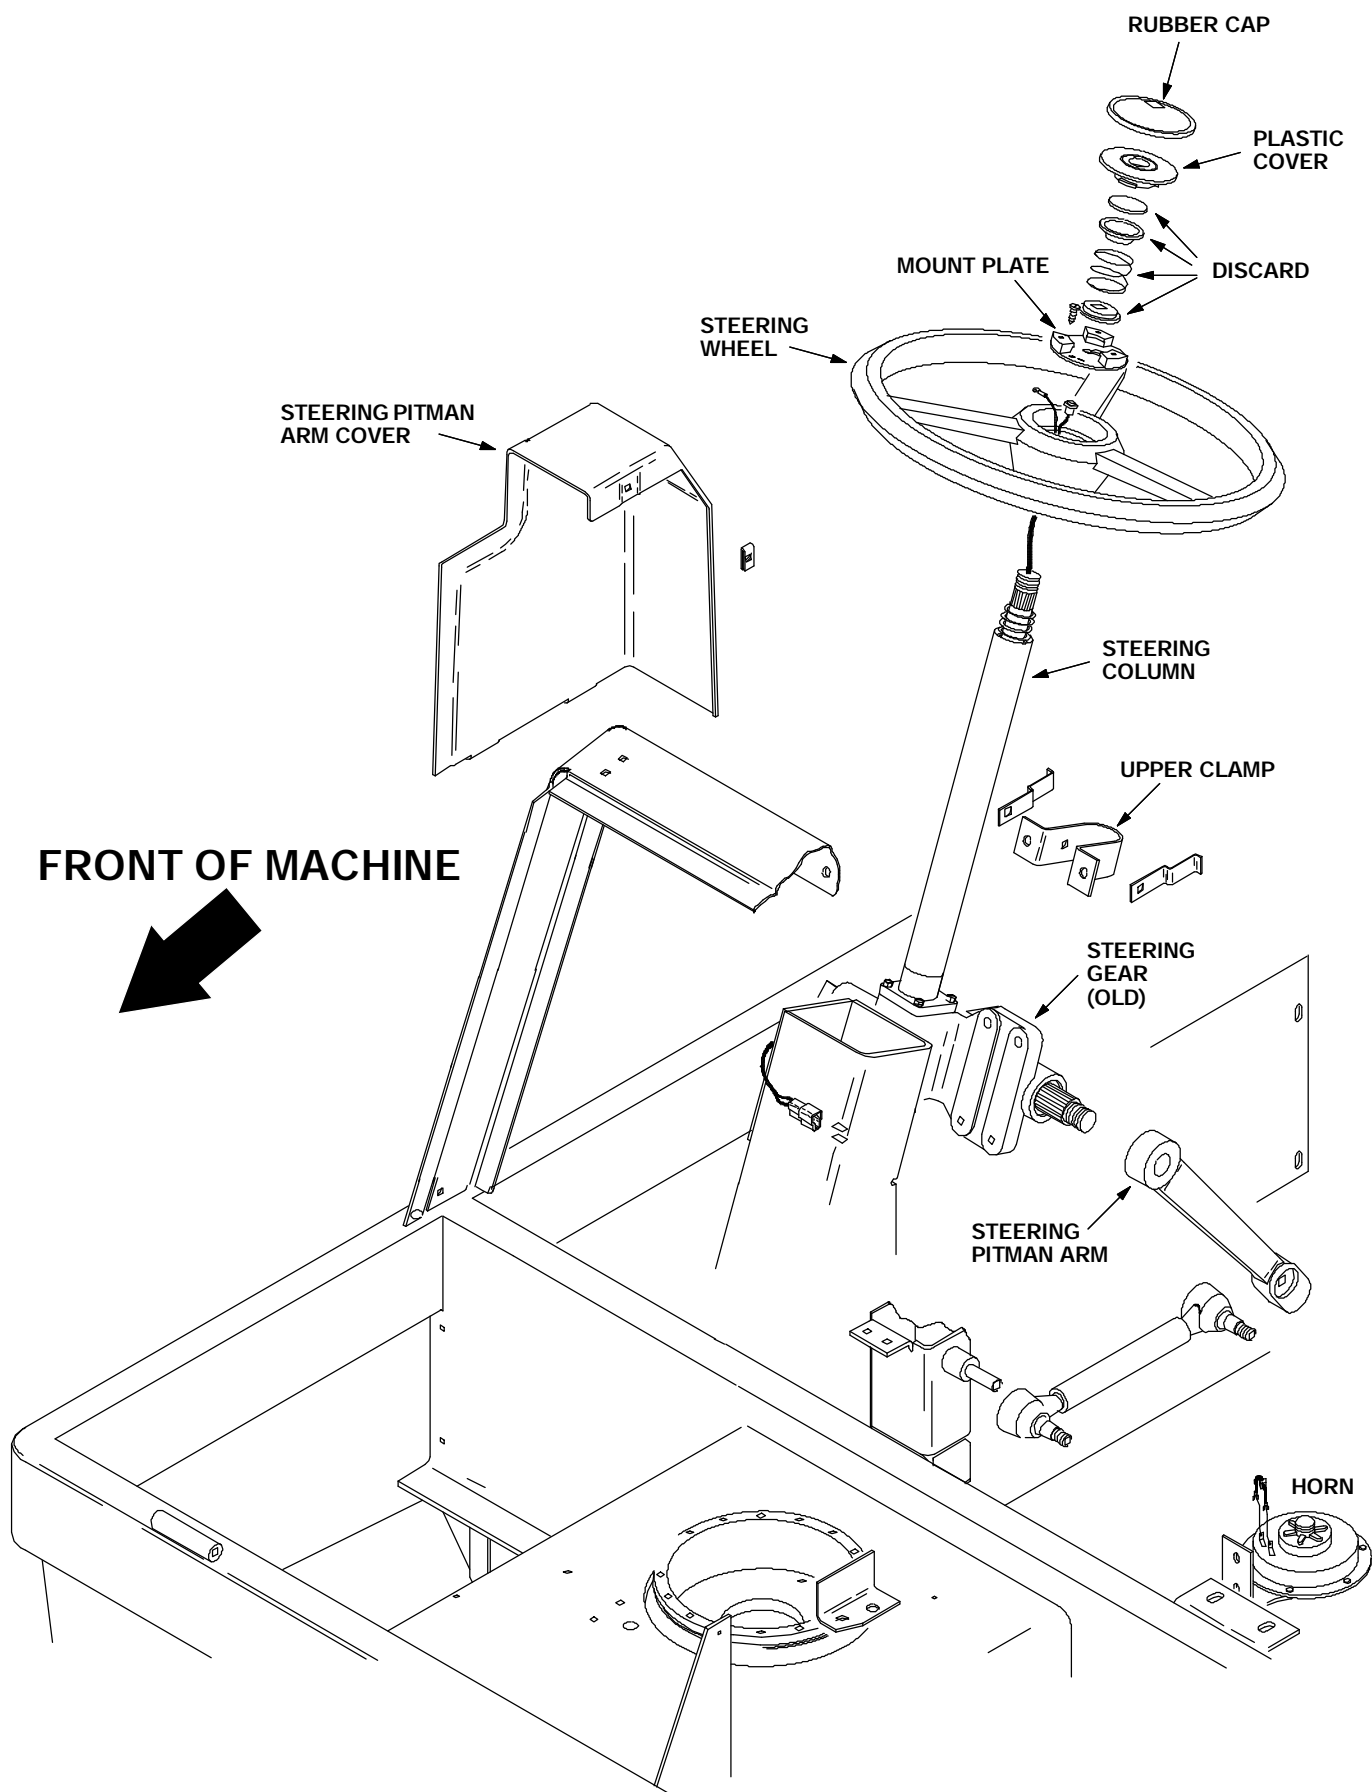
Steering Gear, Horn, And Pitman Arm
